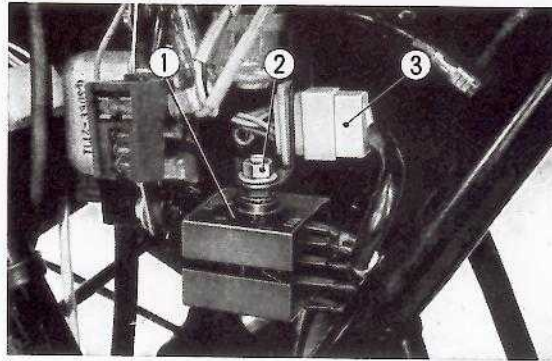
① Silicon rectifier ② Rectifier setting nut ③ Connector
